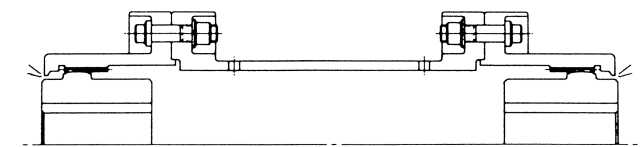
Special Purpose Continuously Lubricated Gear Coupling.
